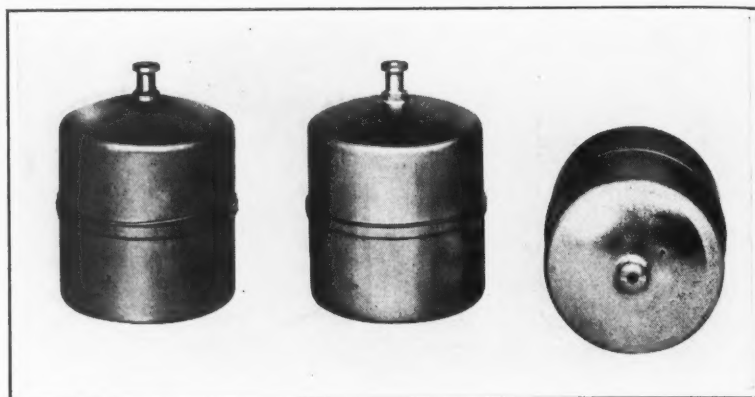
Steel Float Made of Five Inexpensive Parts which are Copper Brazed in an Electric Furnace. View at Left Shows Part Ready for Brazing, and Two Views at Right Show Floats after Brazing
